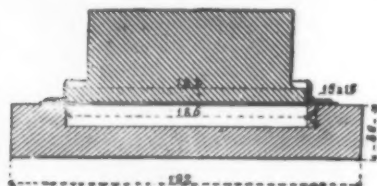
SECTION OF HYDRAULIC DYNAMOMETER.
